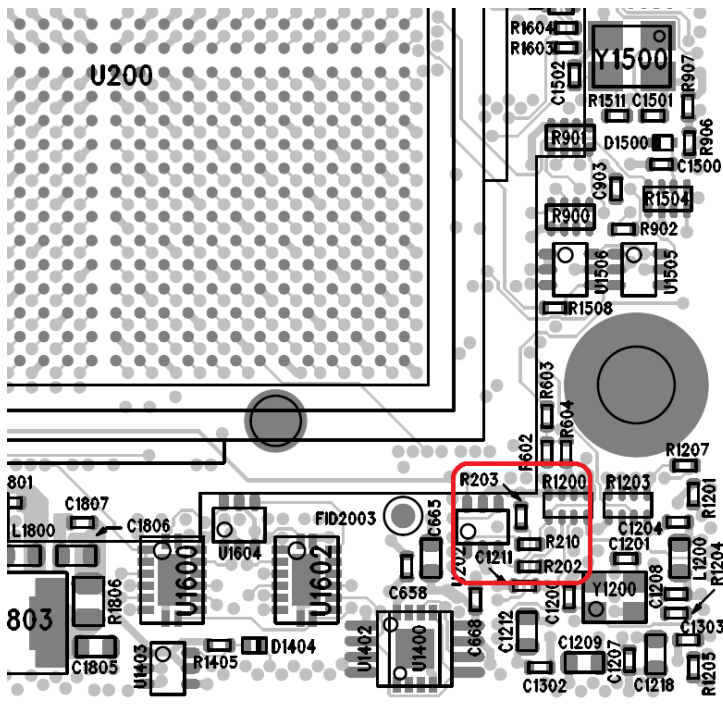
Pull-Up During Configuration (PUDC) Resistors - Assembly Drawing Top View (lower right part)
